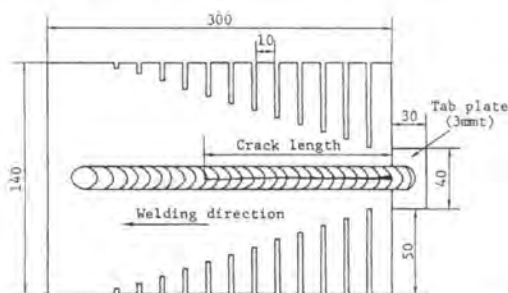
Shape and dimension of Modified Houldcroft test specimen. (Specimen thickness: 3 mm)
